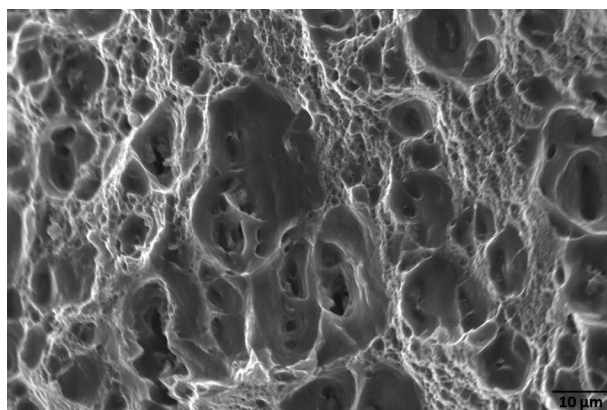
High magnified image of the fracture surface shown in Fig. 212
